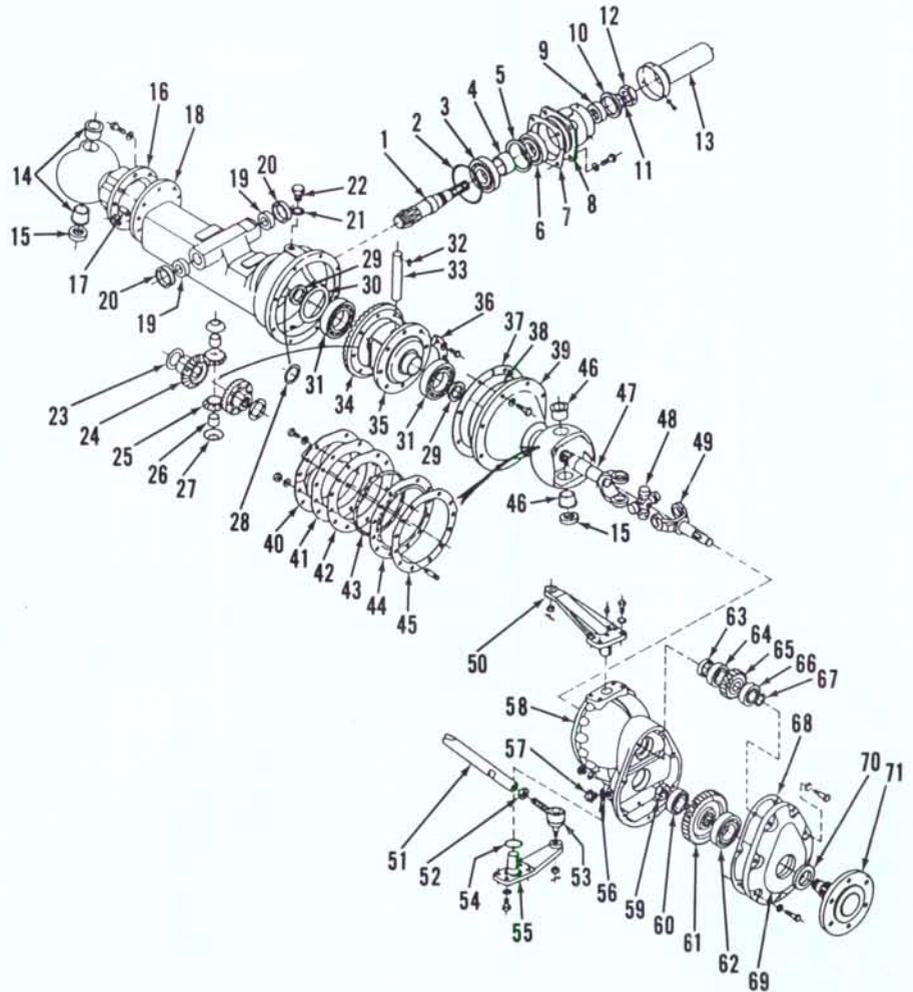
Exploded view of front-wheel drive axle used on Model L225DT.
